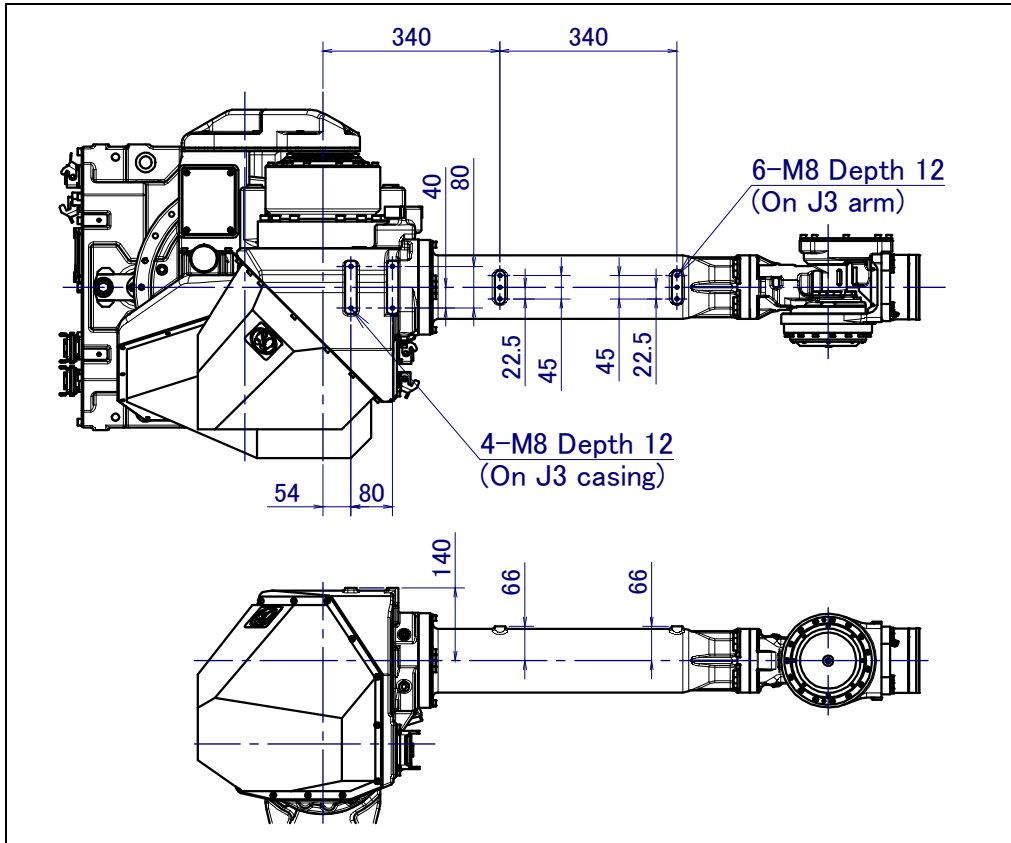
(b) Equipment mounting surfaces (M-710iC/50H)
